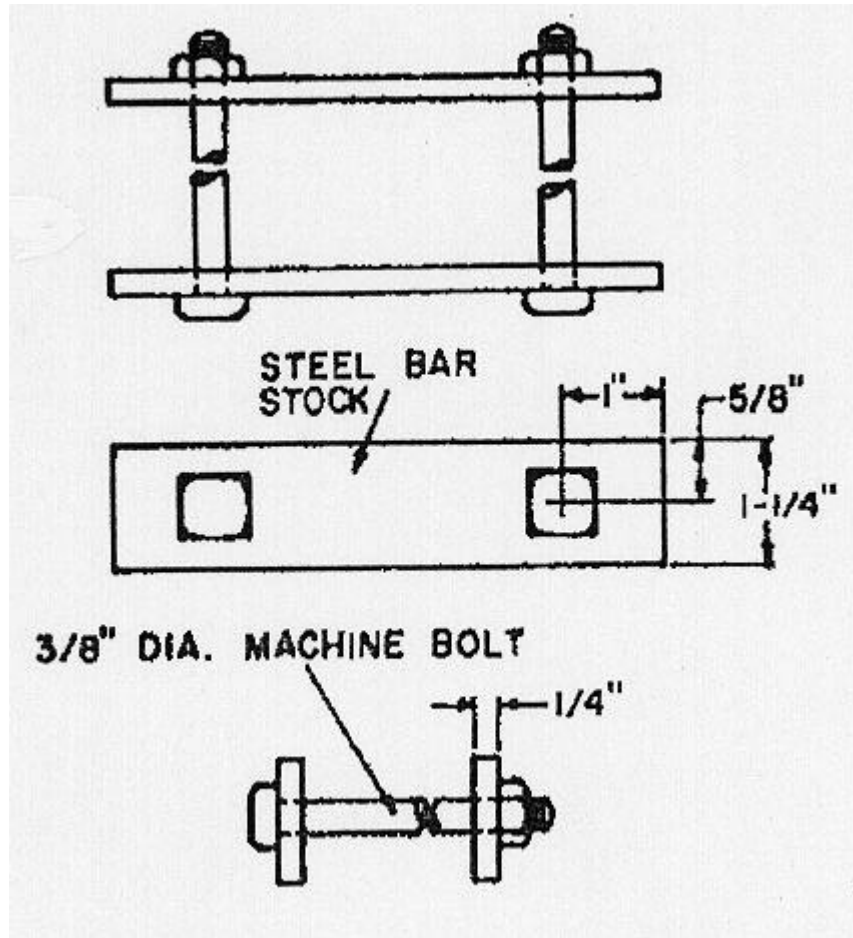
CLAMPING DEVICE USED FOR FORK SECUREMENT ON M.H.E.
